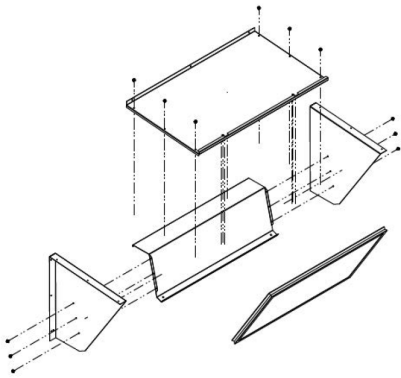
ECONOMIZER HOOD ASSEMBLY
